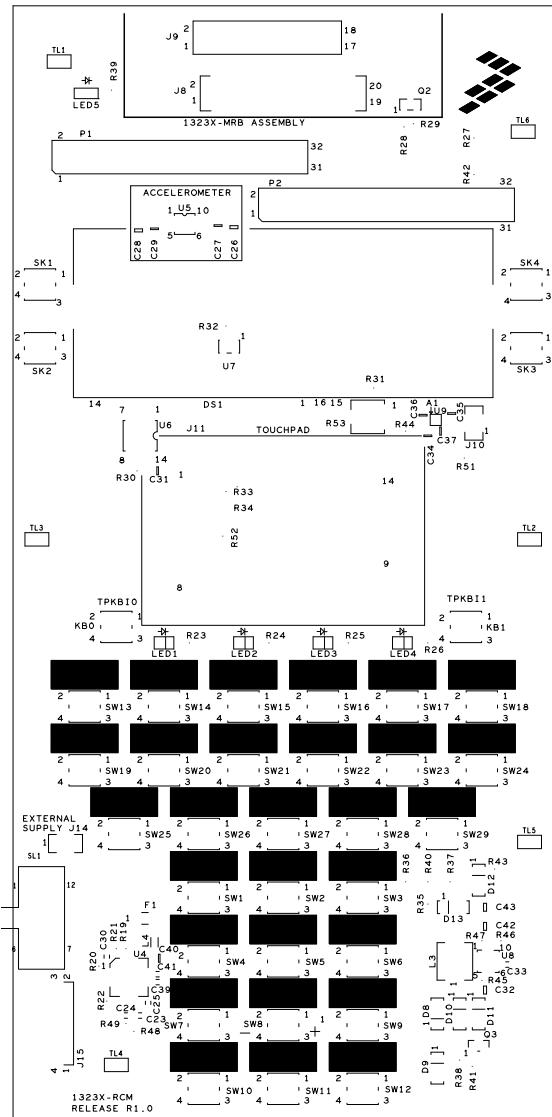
1323x-RCM PCB Component Location (Top View)
